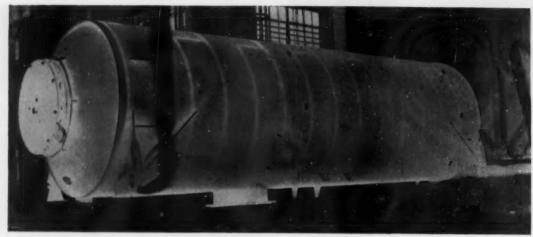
Stainless-steel vessel after removal from a heat-treating furnace. Thorough soaking is required to assure uniform heating throughout the work.
